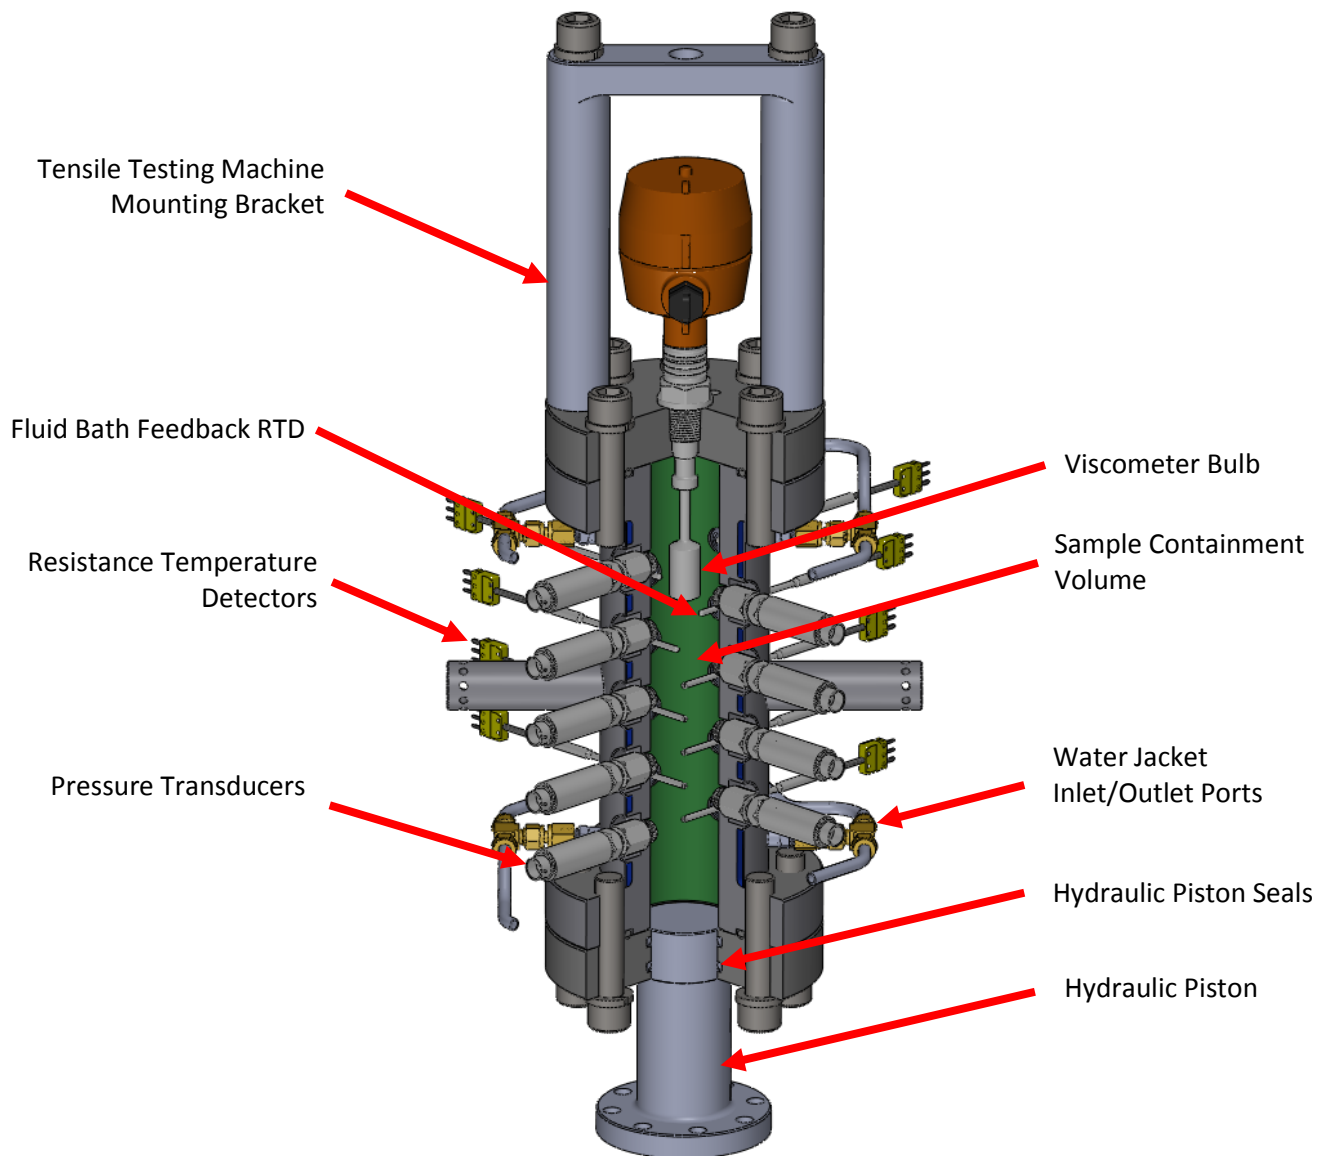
Sectioned CAD rendering of the final test chamber shown with all sensor equipment installed.
